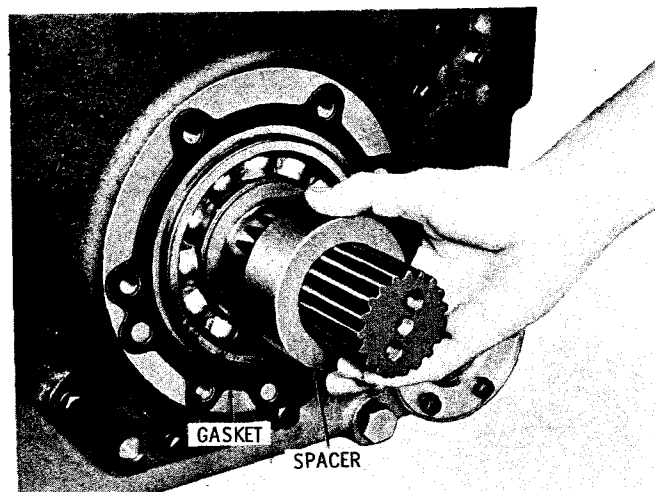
Removing spacer from output shaft (models with rear output)
